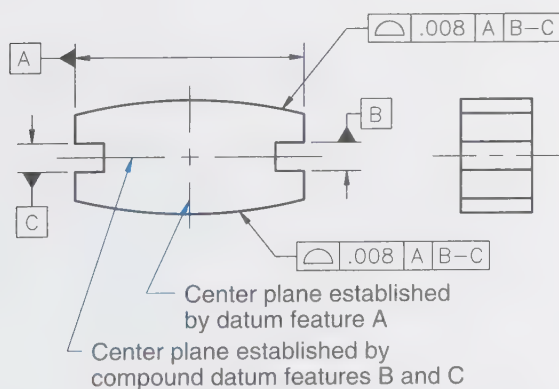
Rectangular features of size may be used as compound datum features to establish a datum plane.
